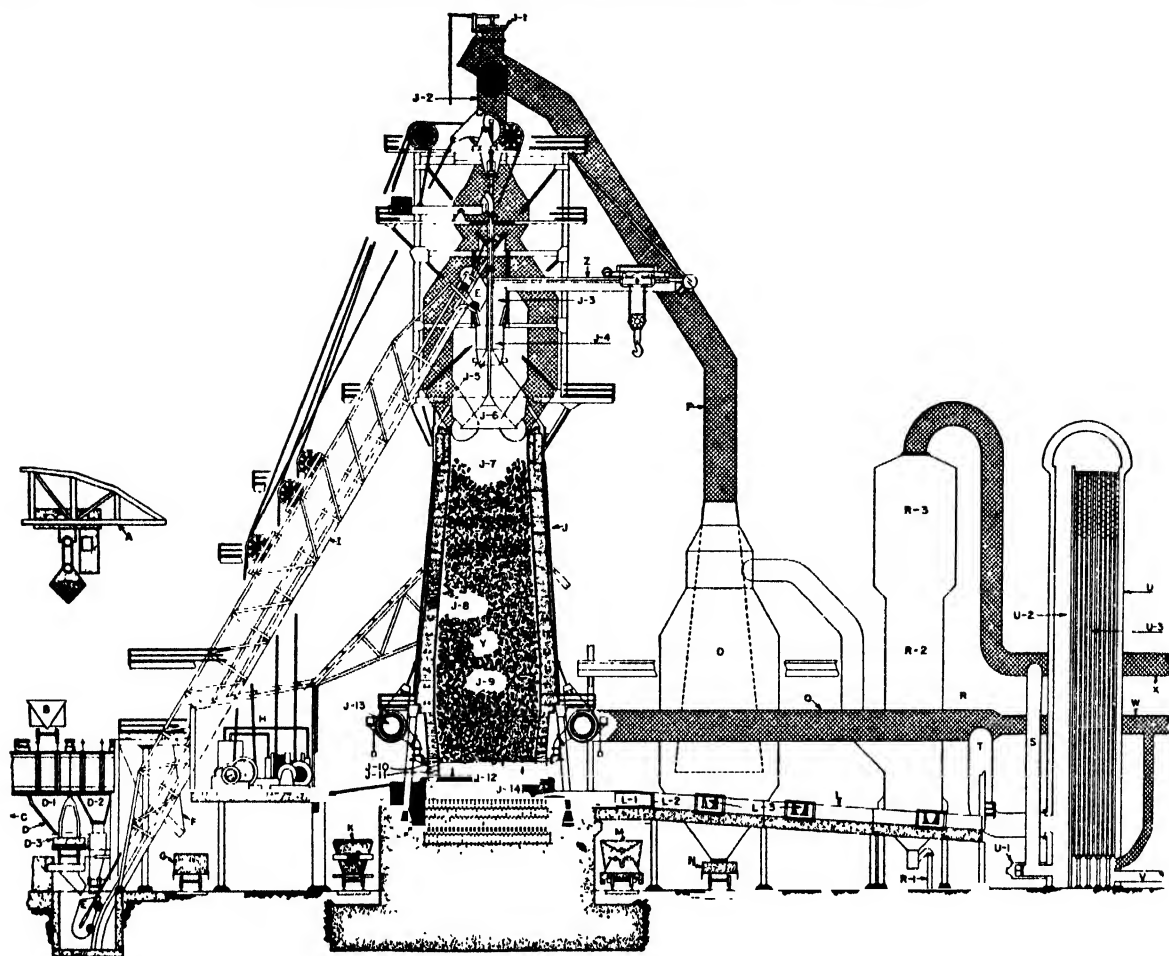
2. Idealized cross-section of a typical modern blast-furnace plant. Details may vary from plant to plant.
